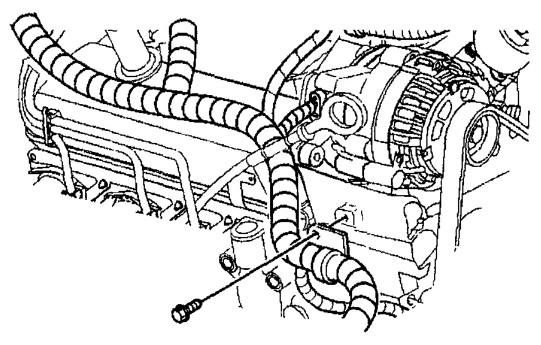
Locating Ground Wire & Engine Wiring Harness Clips Courtesy of GENERAL MOTORS CORP.
